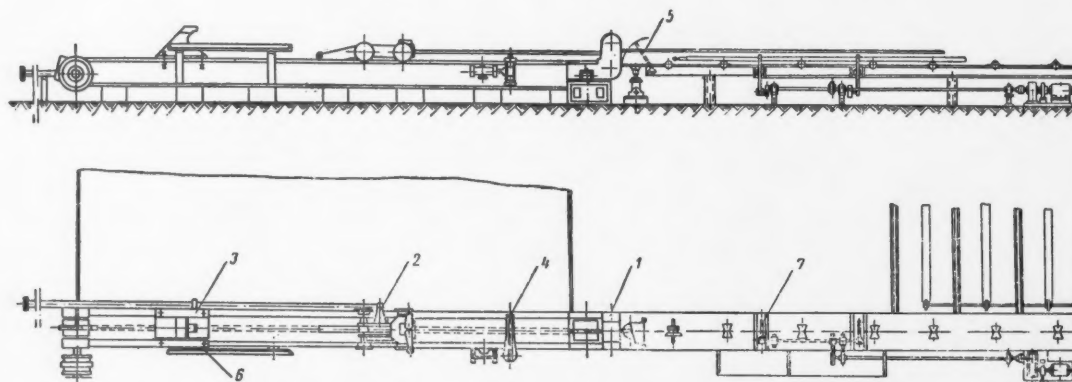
General view of rod-withdrawal installation and all equipment. 1) Mechanized die-block; 2) automatic pleyer with pneumatic drive; 3) uncoupling block; 4) rod discarder; 5) installation for tube-withdrawal from die-block; 6) uncoupling edge; 7) tube discarder.
